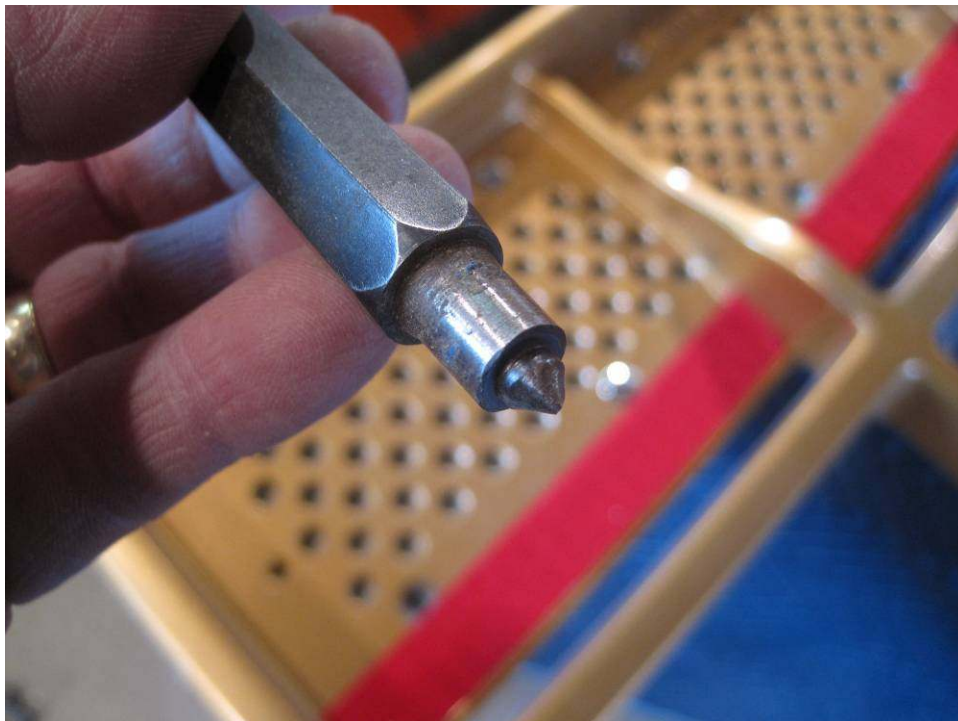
The specialized plate punch used to mark the center of the tuning pin holes.
